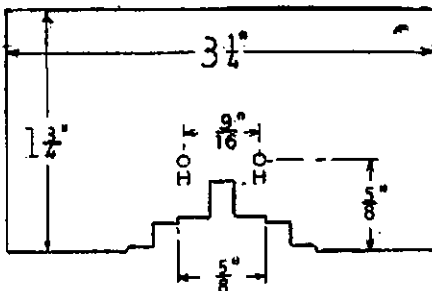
Shield for p.p. 6J6 stage, showing extent to allow fitting over the socket and its associated fixing bolts.
